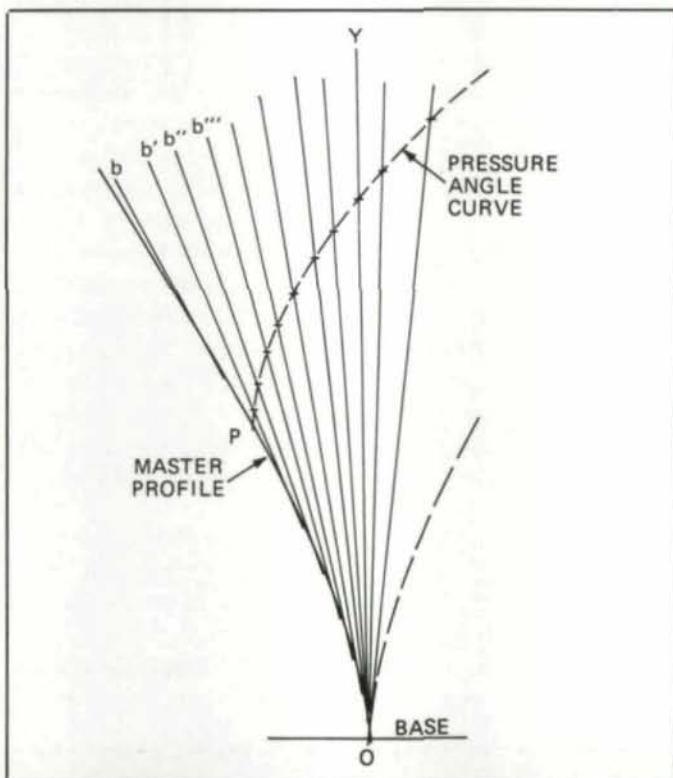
Control lines representing positions of straight side of hob in generation of gear tooth form.
